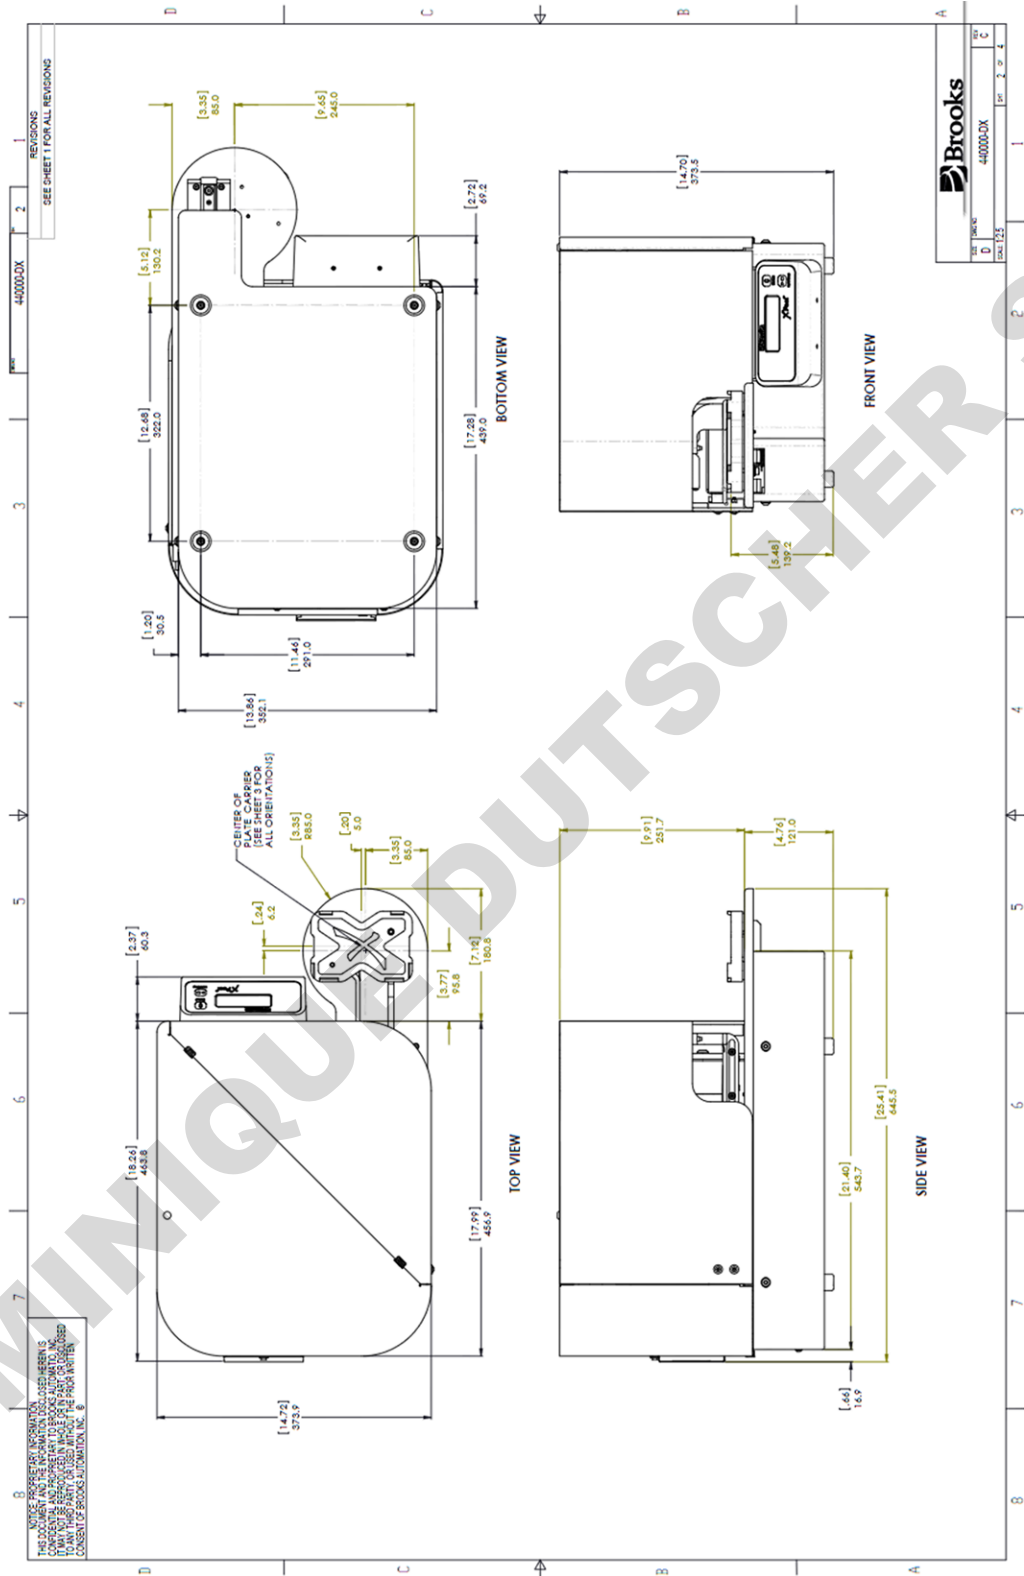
Automated Plate Seal Remover Unit Dimensions
